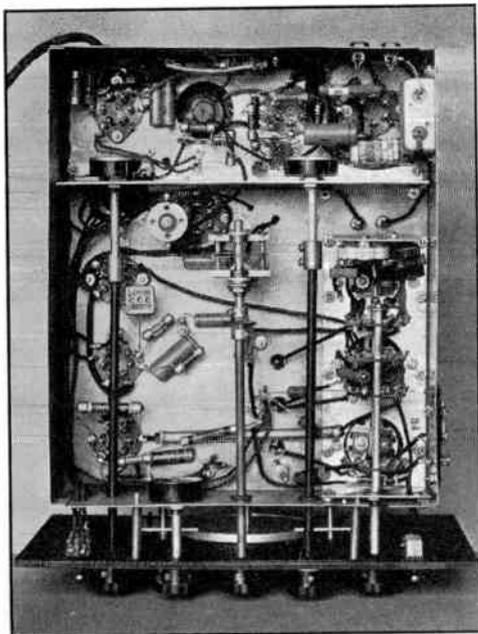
BOTTOM VIEW OF THE BAND-SWITCHING SUPERHETERODYNE
